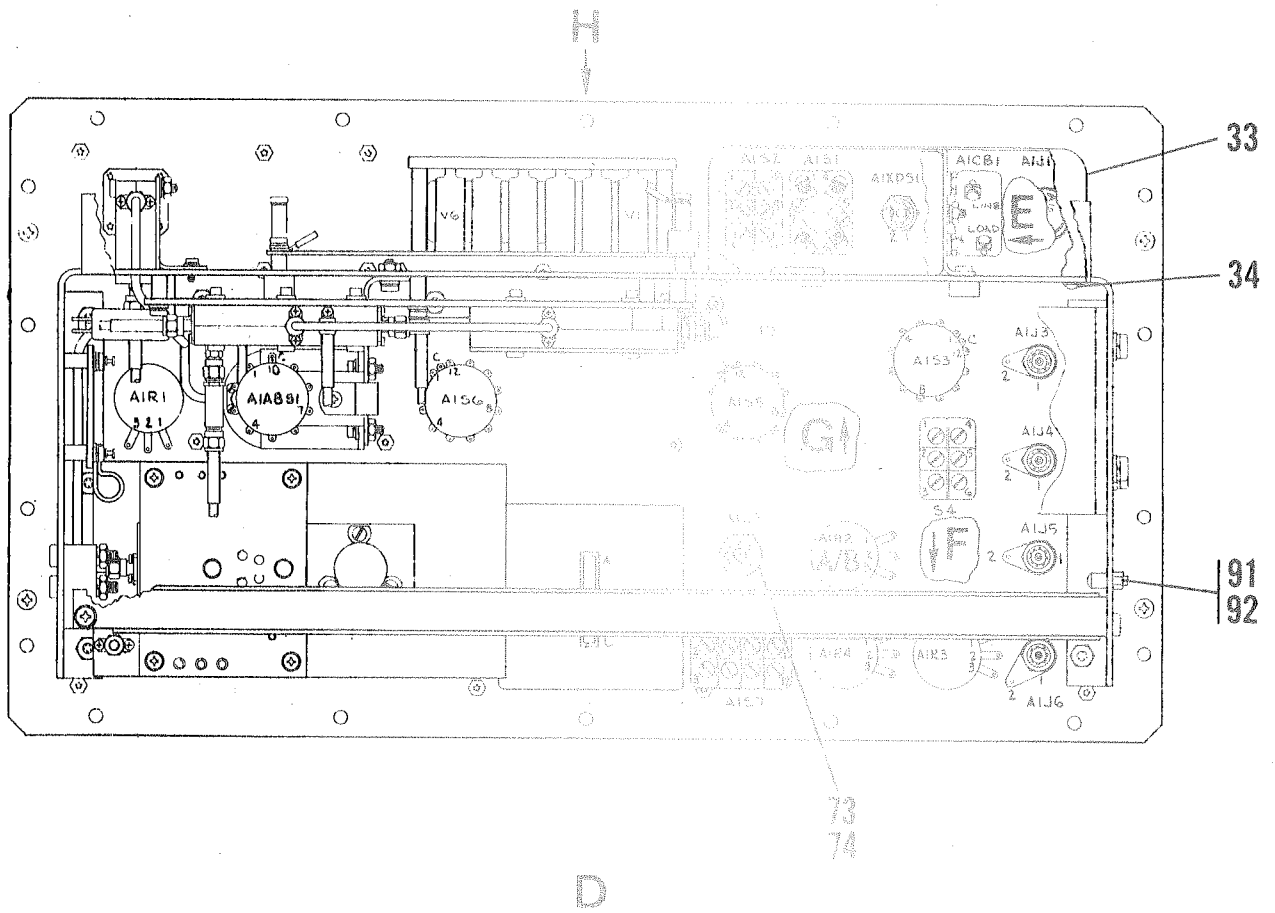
Test Set, Electronics Assembly (Sheet 3 of 6)
